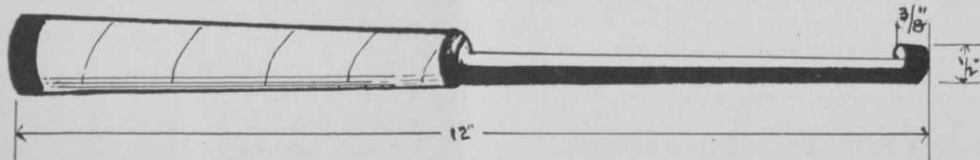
Fig. II.—This illustrates soil sampler made from grip end of discarded steel shafted club. Cut shaft 12" to 14" long. Remove grip cover up to within 6" and with emery wheel grind out section of shaft as shown. A $\frac{3}{8}$ " sharpened collar cuts the plug for soil tests.
